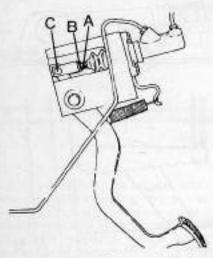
Remove pin (C) from rod (A) and loosen locknut (B) and adjust master cylinder as outlined in paregraph 241.
